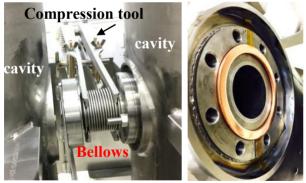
Bellows compression tool (left) and low profile flange with secured copper gasket (right).
